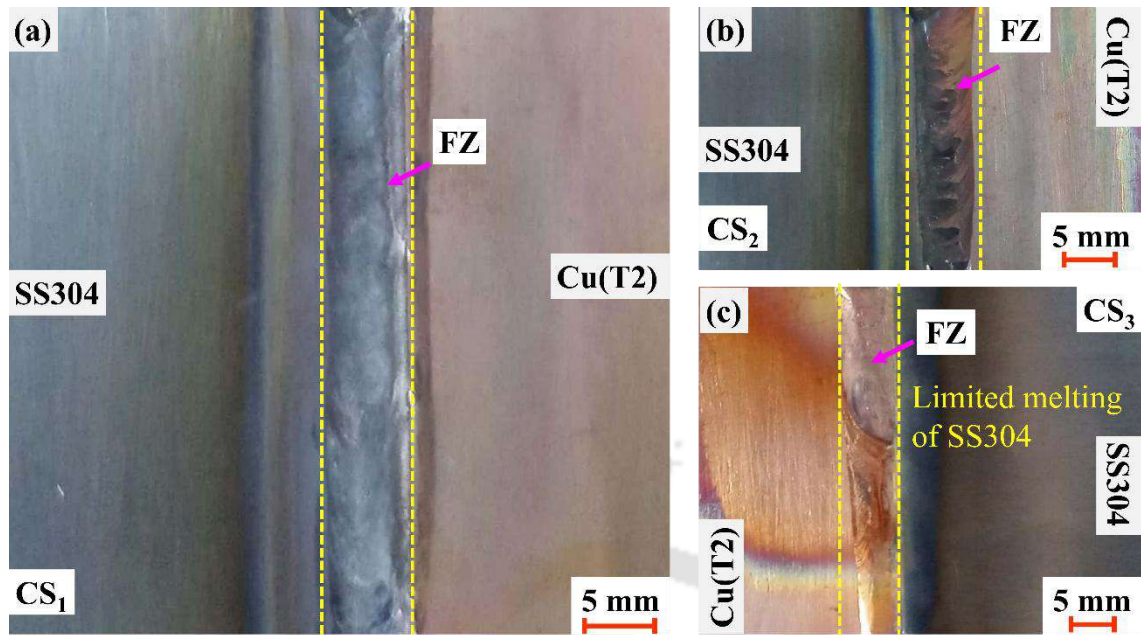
Depicts the top view of the Cu-SS bimetallic joints without any visible defects for (a) CS₁, (b) CS₂, and (c) CS₃ weld conditions.
